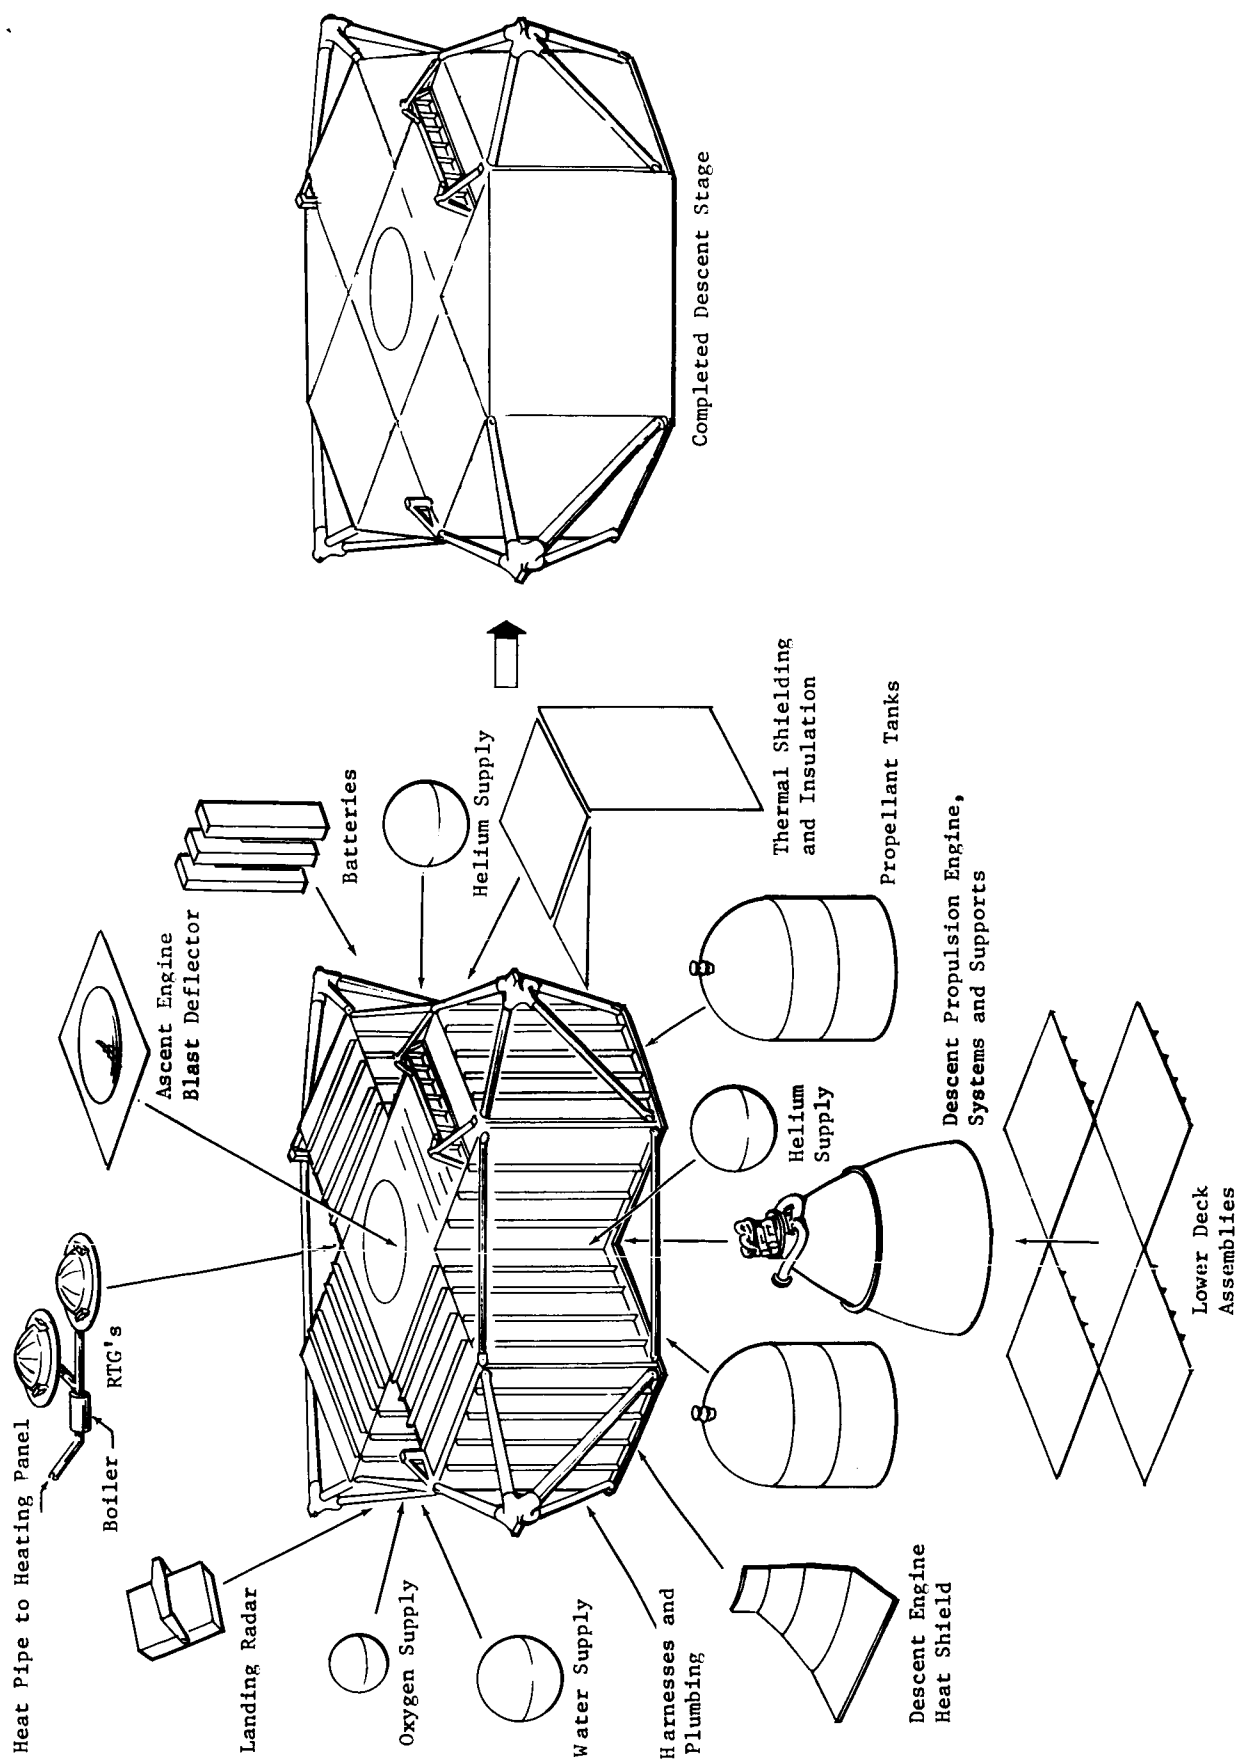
Final Assembly Flow - LEM Shelter "1" Descent Stage
